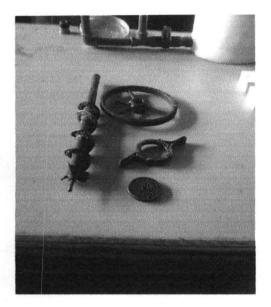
Parts of the pelletizer (screw shaft, pulley, die and die holder)
